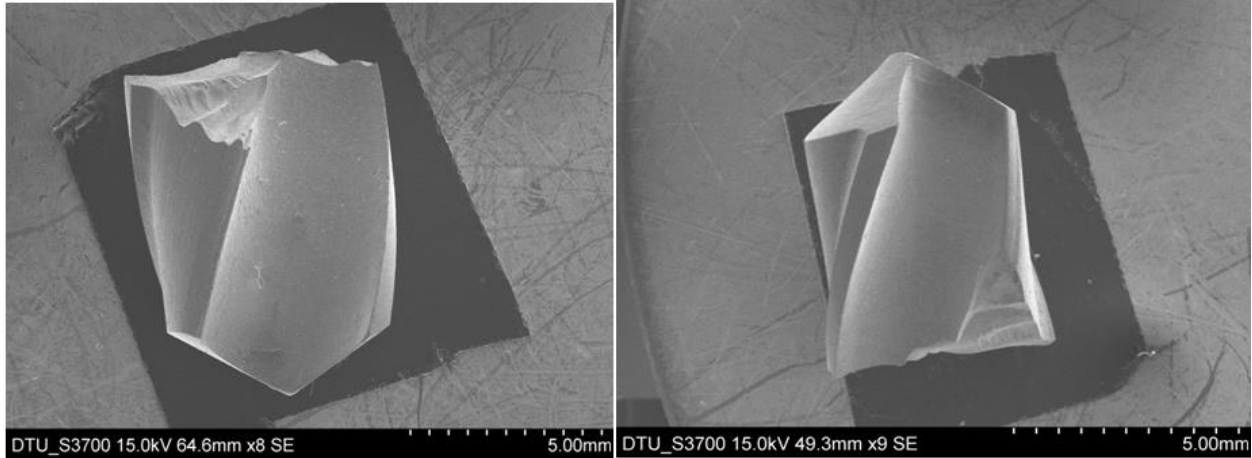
SEM(Scanning Electron Images) of coated and non coated HSS drilling tool before machining
